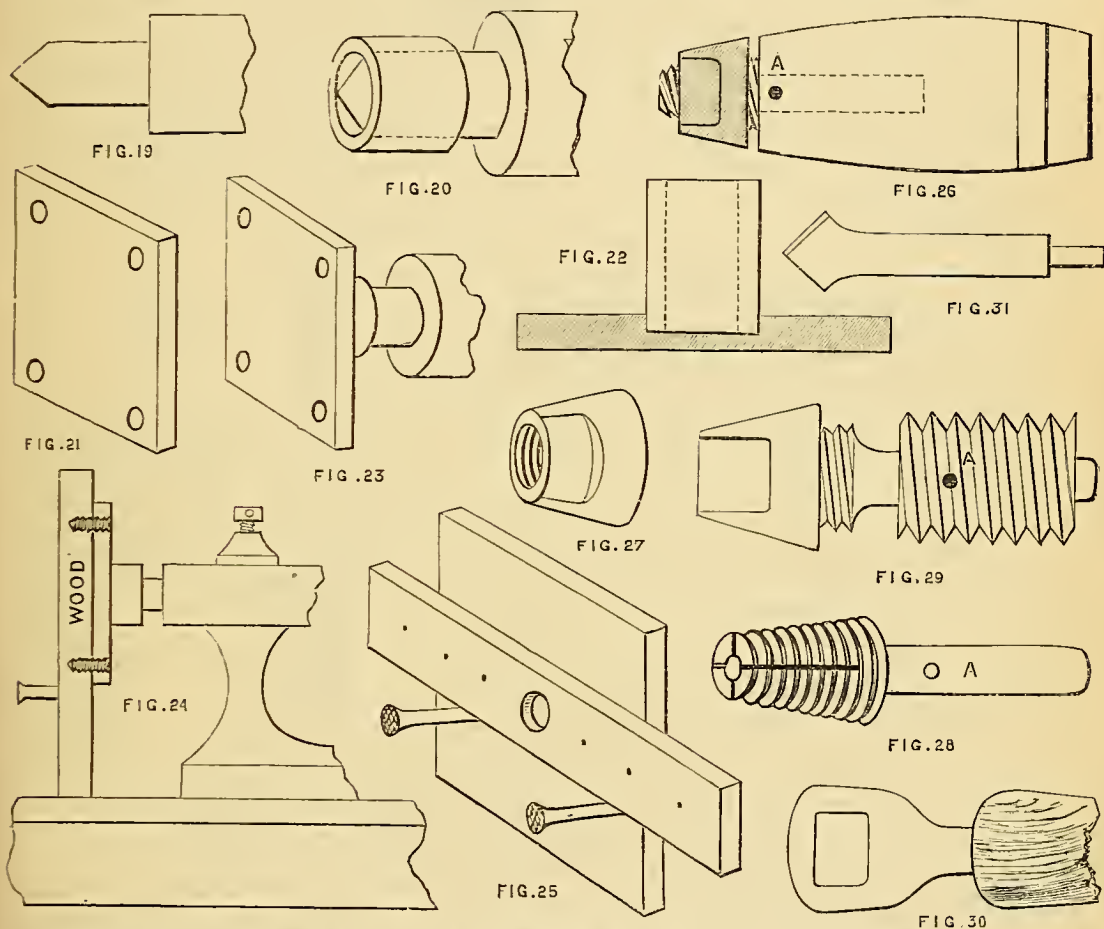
DEAD CENTRE AND POPPIT BARREL. FIG. 20.—BRASS TUBE ON POPPIT BARREL. FIG. 21.—BRASS PLATE. FIG. 22.—CROSS SECTION OF TUBE IN BRASS PLATE. FIG. 23.—DRILLING TABLE, COMPLETE, IN POSITION. FIG. 24.—ELEVATION OF LATHE BED AND DRILLING TABLE WITH WOOD ATTACHED. FIG. 25.—SKETCH SHOWING METHOD OF DRILLING STRIP OF METAL. FIG. 26.—HANDLE COMPLETE, AS PURCHASED. FIG. 27.—SCREW CAP FOR TIGHTENING UP CHUCK. FIG. 28.—DRILL HOLDER DIVIDED BY SAW CUTS. FIG. 29.—ELEVATION OF FINISHED DRILL CHUCK. FIG. 30.—END OF HANDLE FOR TIGHTENING CHUCK. FIG. 31.—DRILL WITH REDUCED END.
